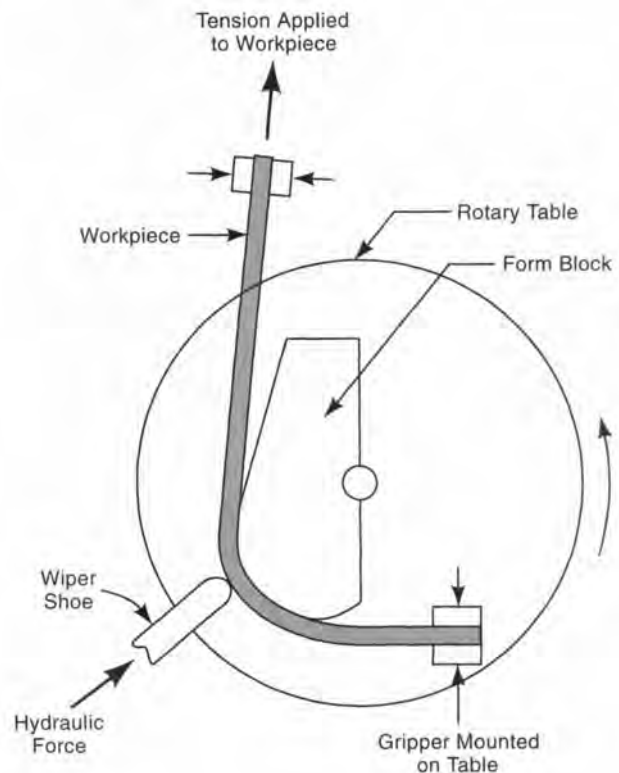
F3d Radial-draw forming. Similar to compression forming but the workpiece is stretched as it is pressed against the rotating form block.
